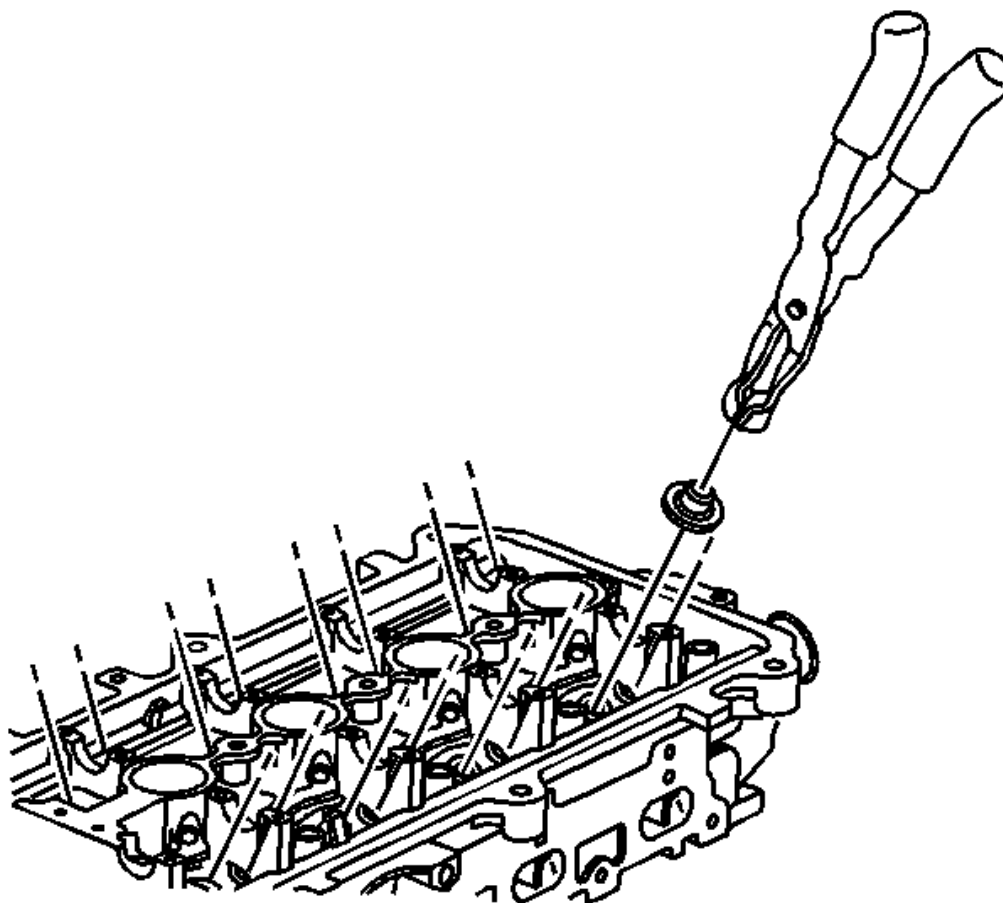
View Of Special Tool J 36017 & Valve Seal
